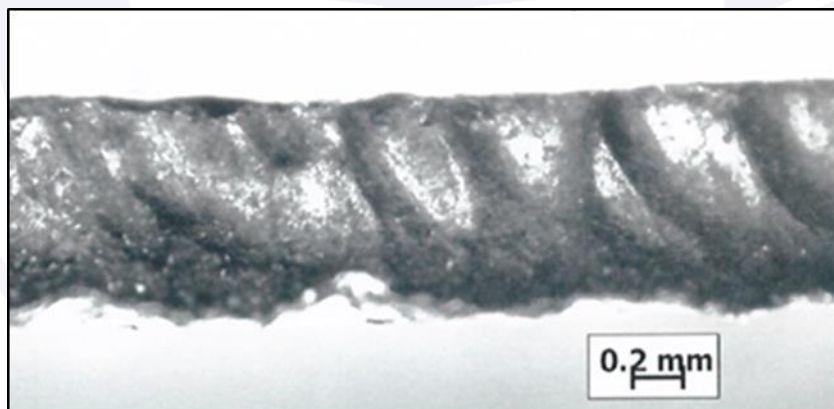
Wavy Exhaust Duct fracture surface, indicating erosion by hot gases.
